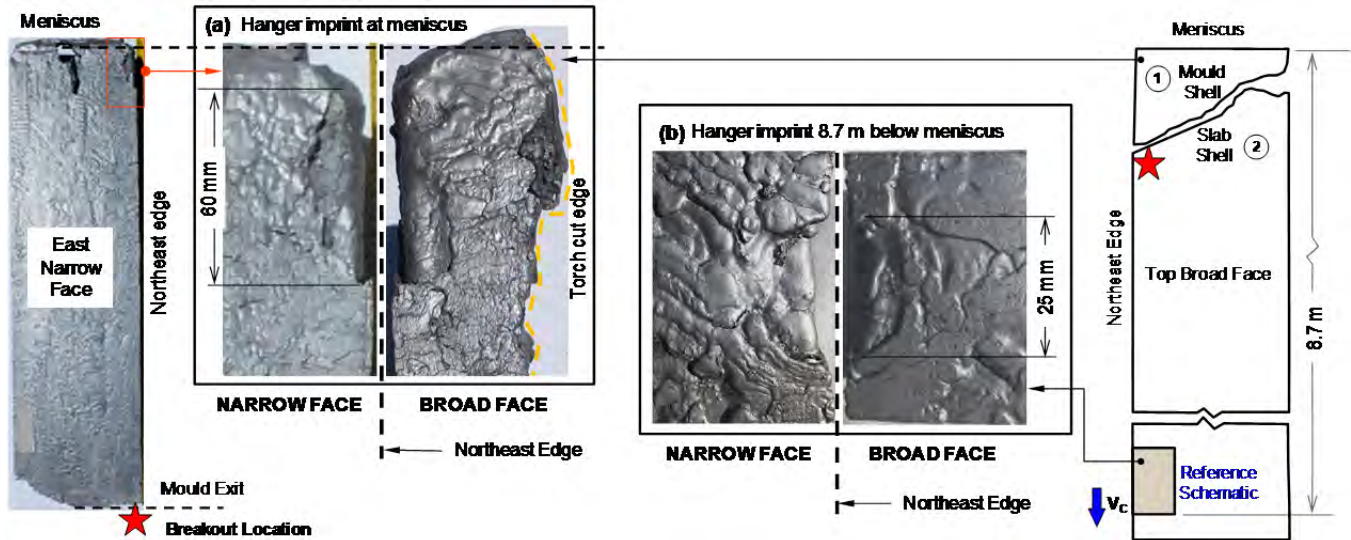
(a) Hanger imprint at meniscus, (b) Hanger imprint on breakout slab
